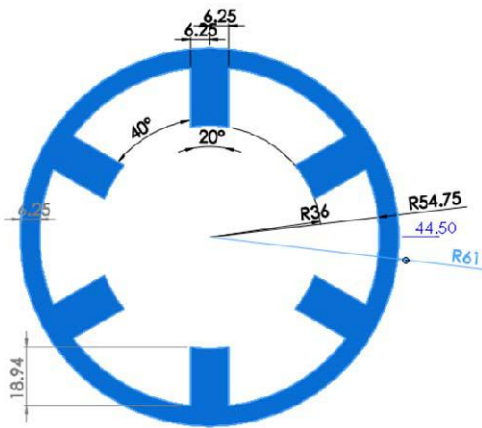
CAD drawing of 2-d cross-sectional view of stator core.
